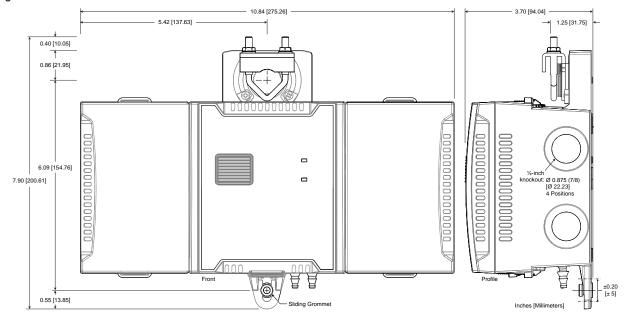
ECB-VAV Controller with Terminal Covers Dimensions
